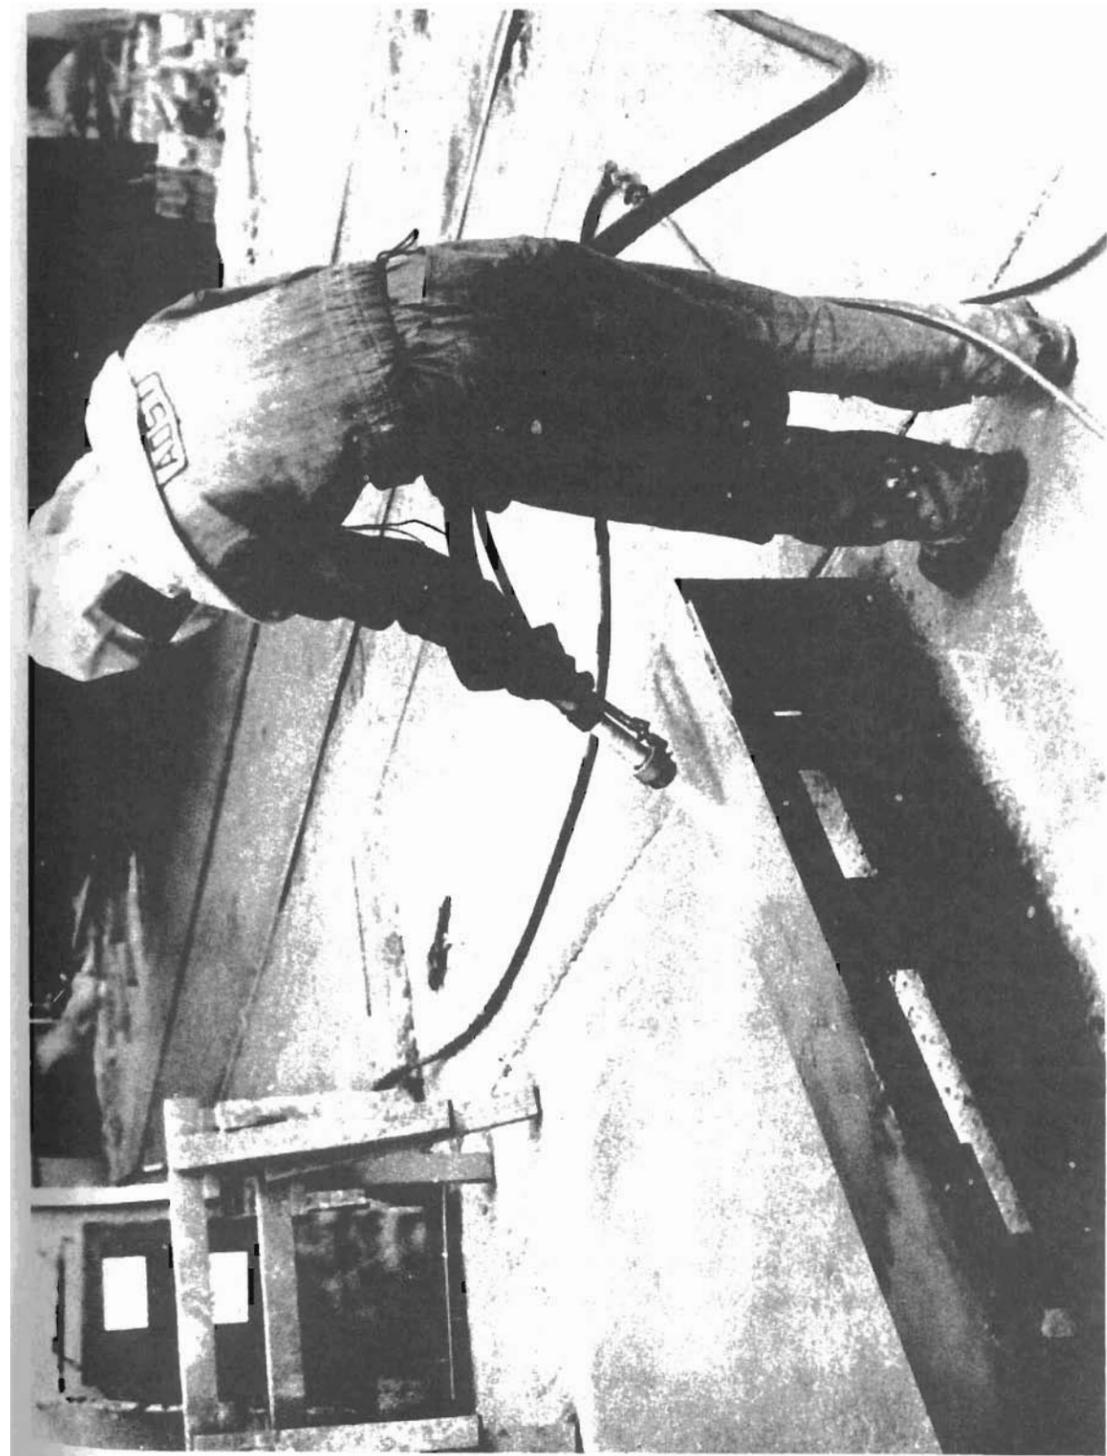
PORTABLE WET BLAST CLEANING MACHINE
